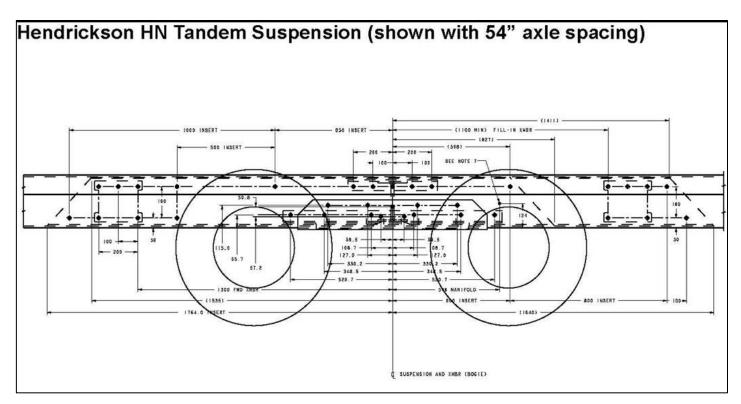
Hendrickson HN Tandem Frame Drilling (Dimensions In Millimeters)
